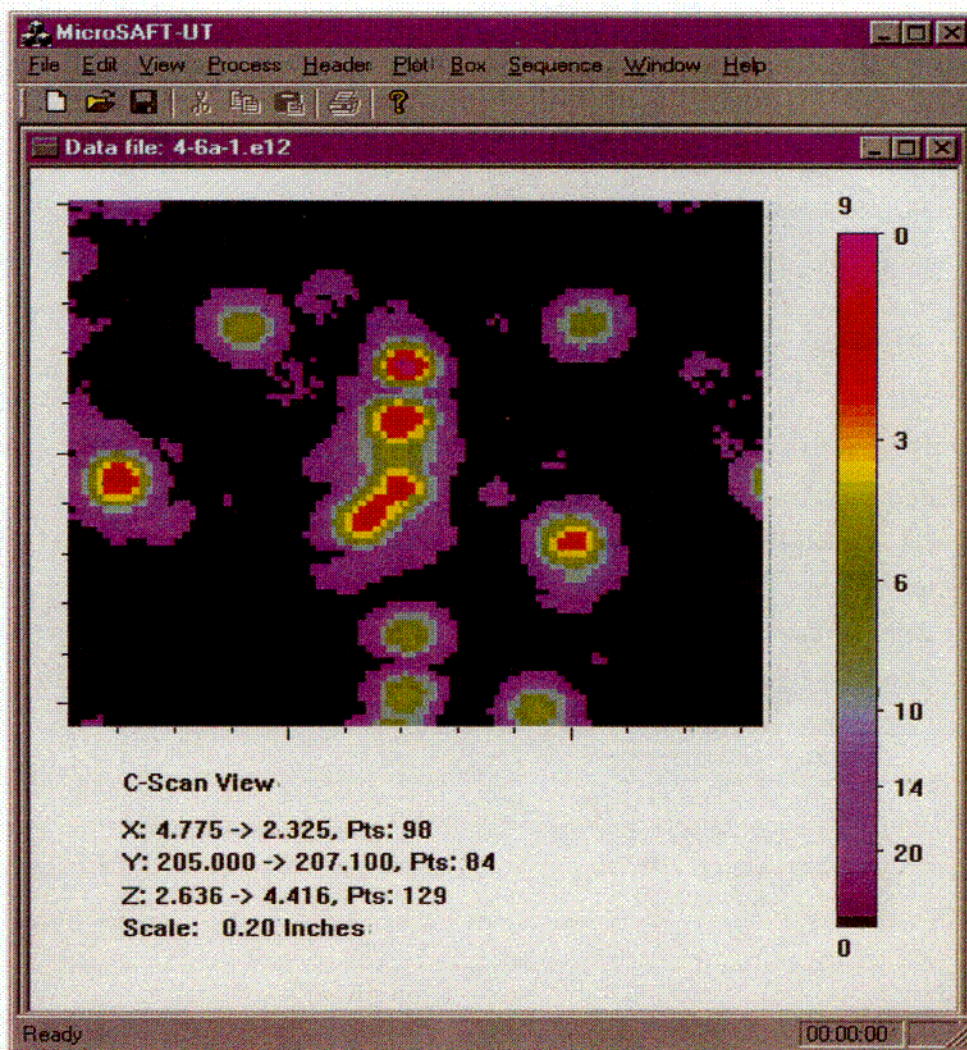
Weld-Normal Ultrasonic Testing Flaw Indication Characterized as Long Lack of Fusion. Clad is to the right in the figure.
